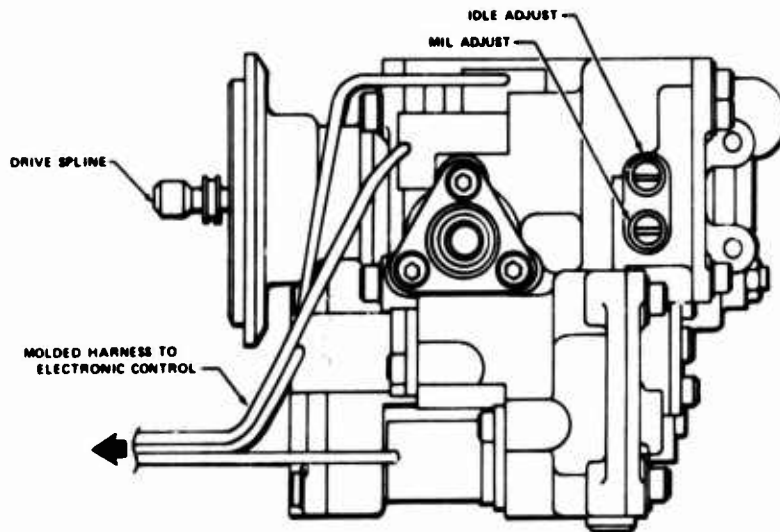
Tower Shaft Drive Fluid Controller and Fuel Pump
